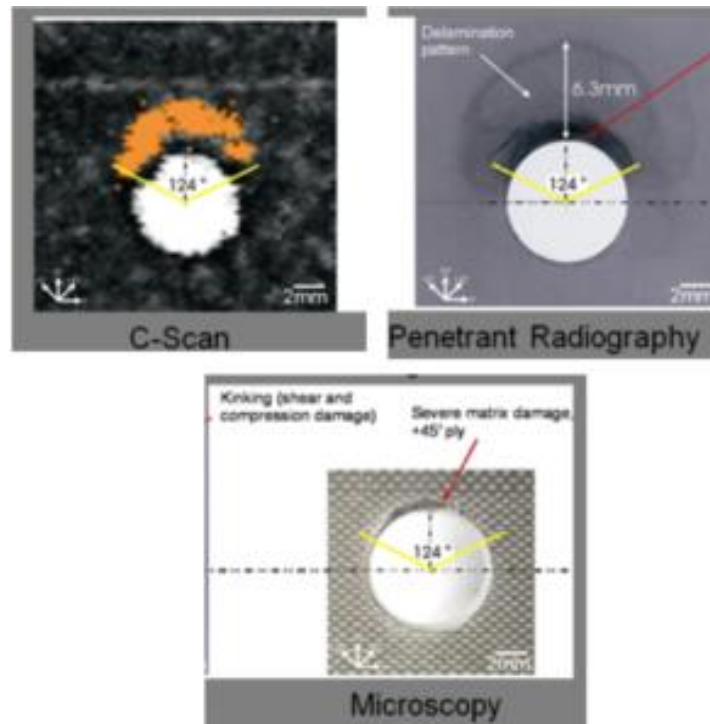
NDI analysis of bearing failure in bolted joint (57 ULIM)
